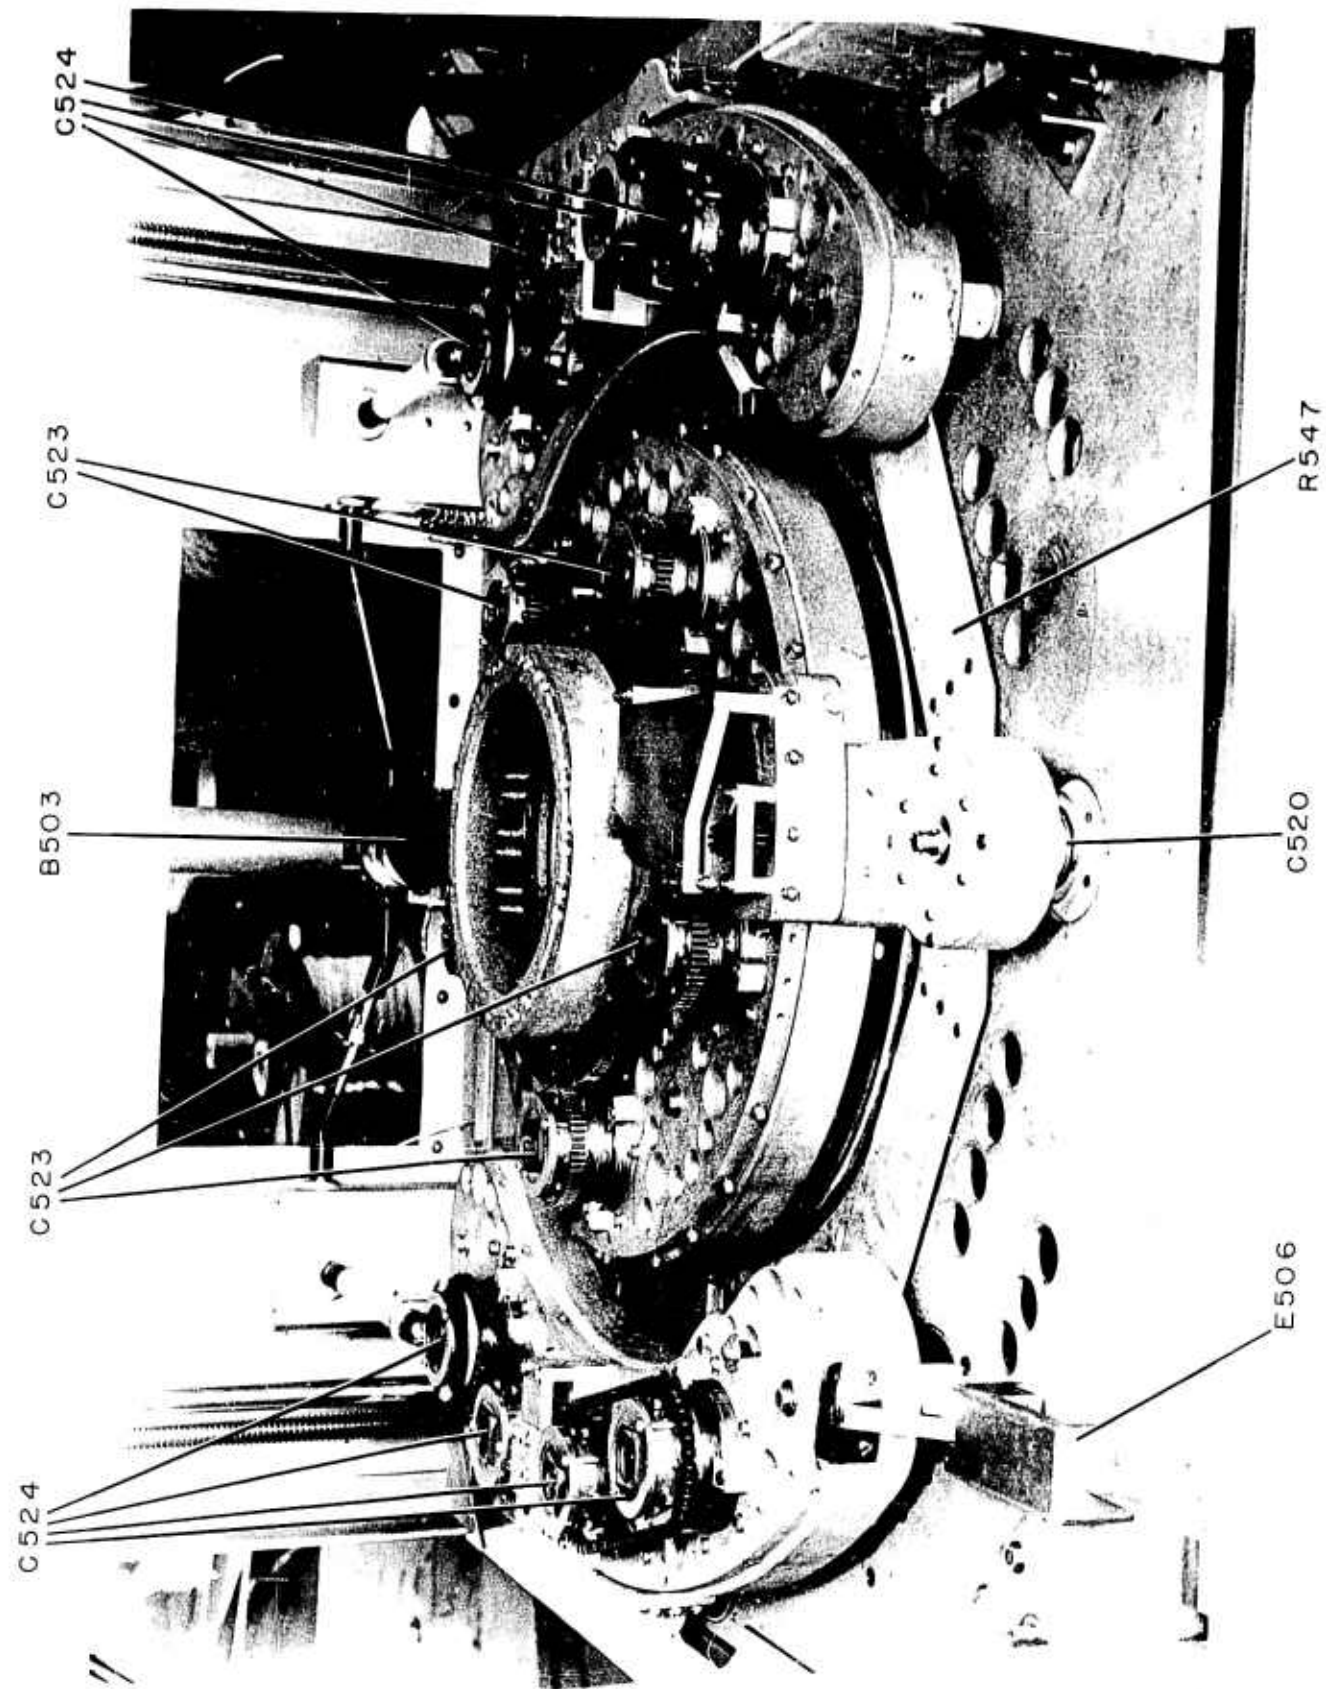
Lower Part of Plate Shelf, Front View, Capacitor
